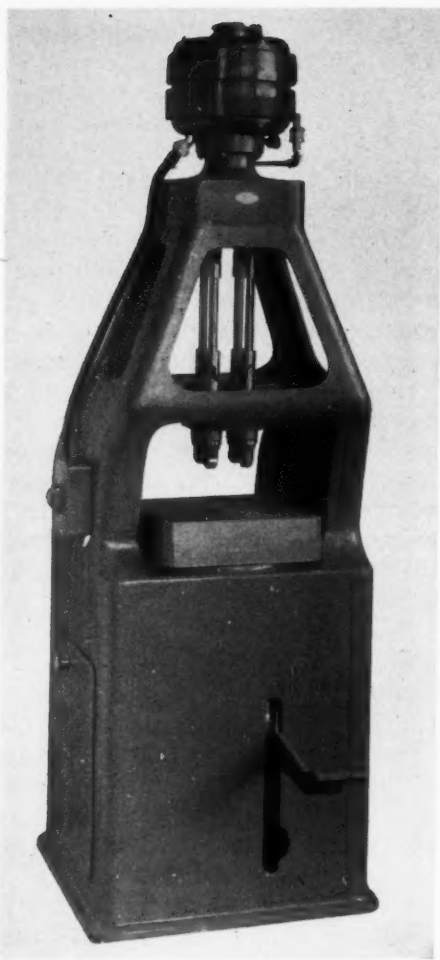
Flange-mounted motor drives rolls through herringbone gears
